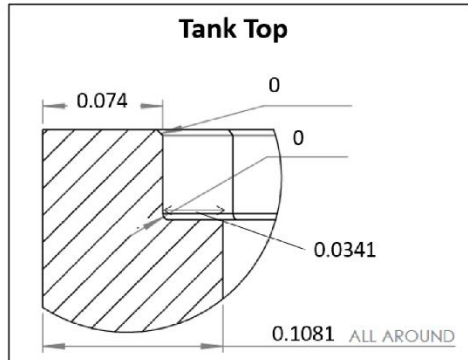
Worst case Weld Geometry – Tank Top
